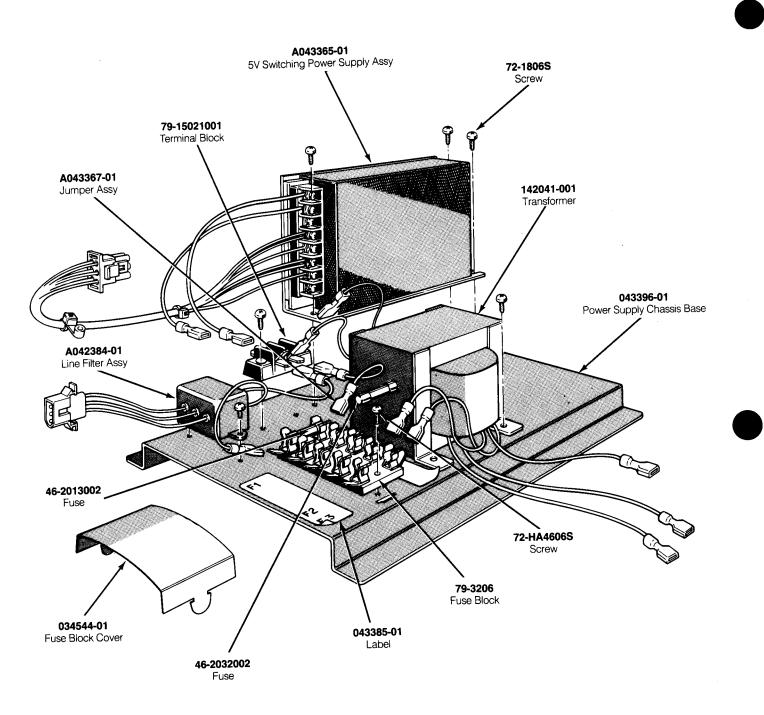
Switching/Linear (SL) Power Supply Assembly A043363-01 A
